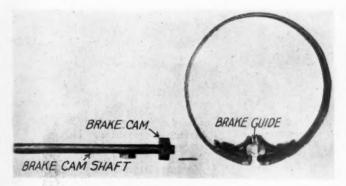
The Internal Brake is Easily Removed by Displacing Cotter Pin From Cam End of Cam Shaft and Slipping Off the Band.
